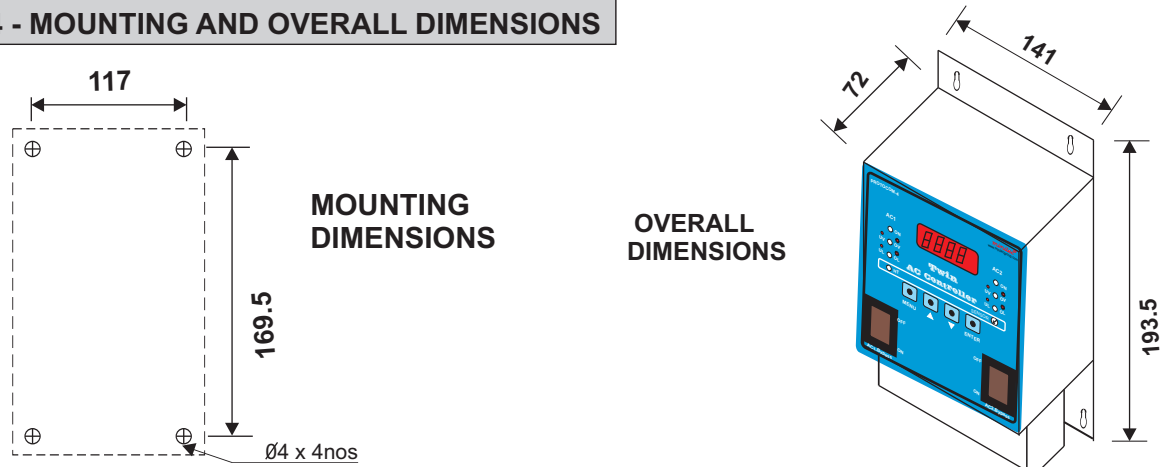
MOUNTING AND OVERALL DIMENSIONS
